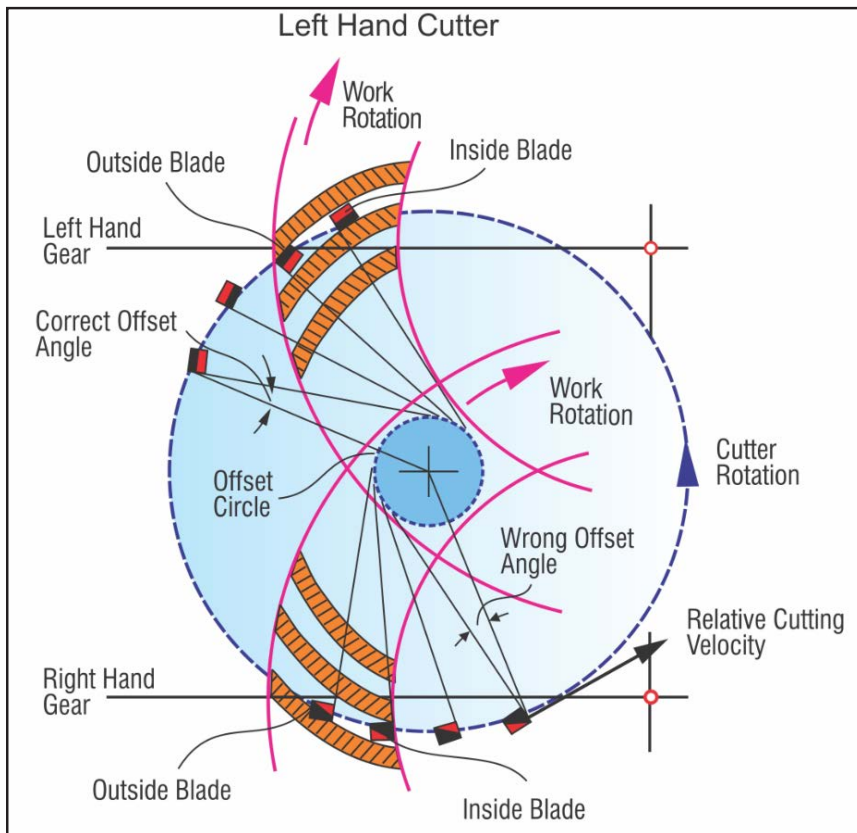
Left-hand cutter with left-hand gear (top) and right-hand gear (bottom).
